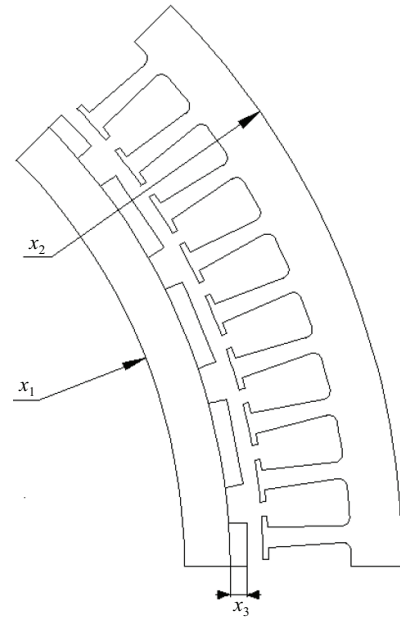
The magnetic circuit of the inner rotor BLDC motor
